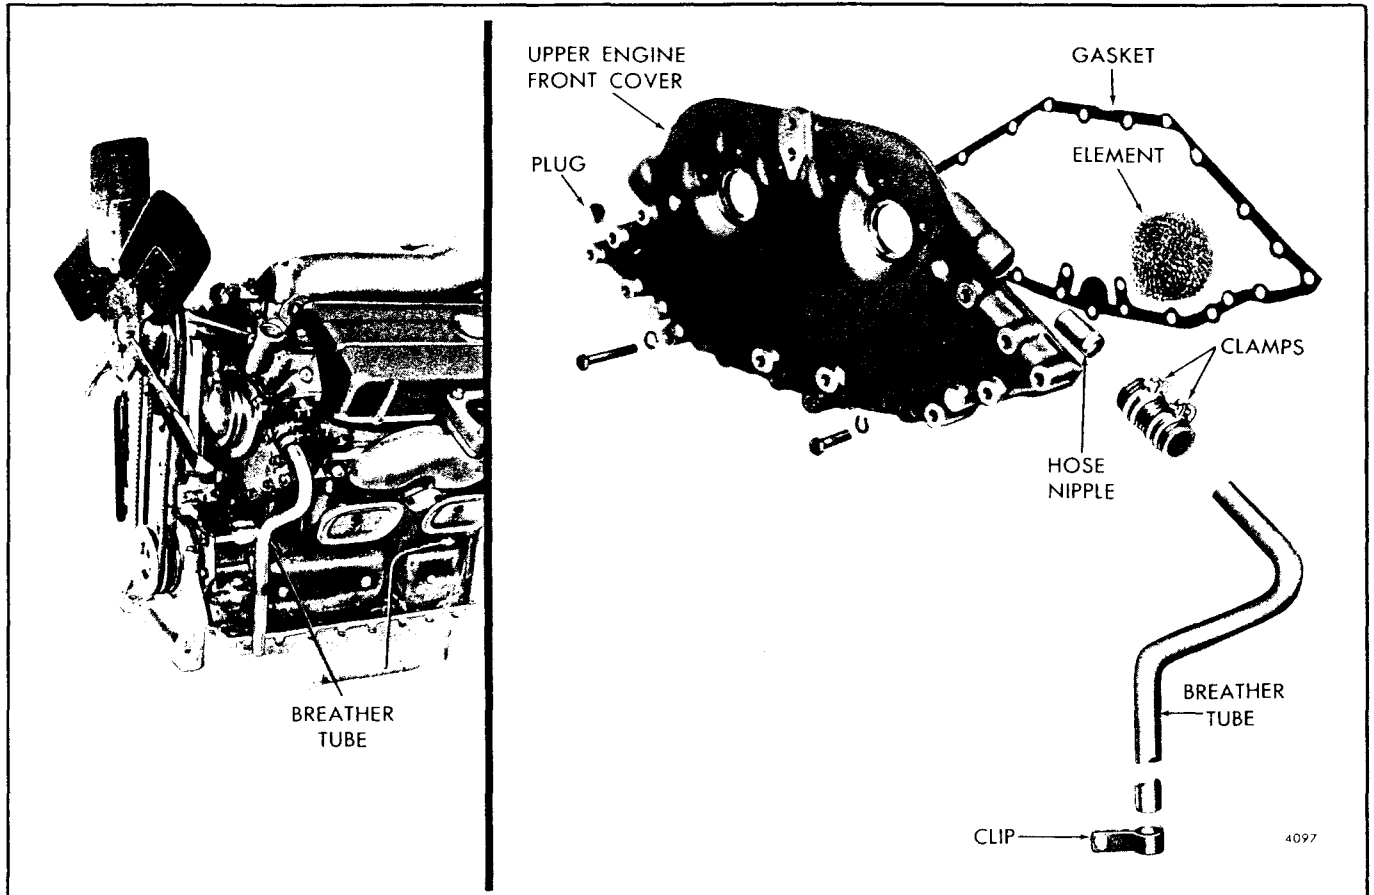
Typical Crankcase Breather Mounting and Details (6V-53 Engine)
